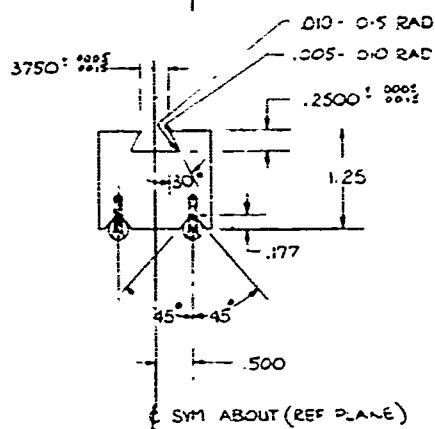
Quality Control test Fixture (Flexure and Interference Section)
